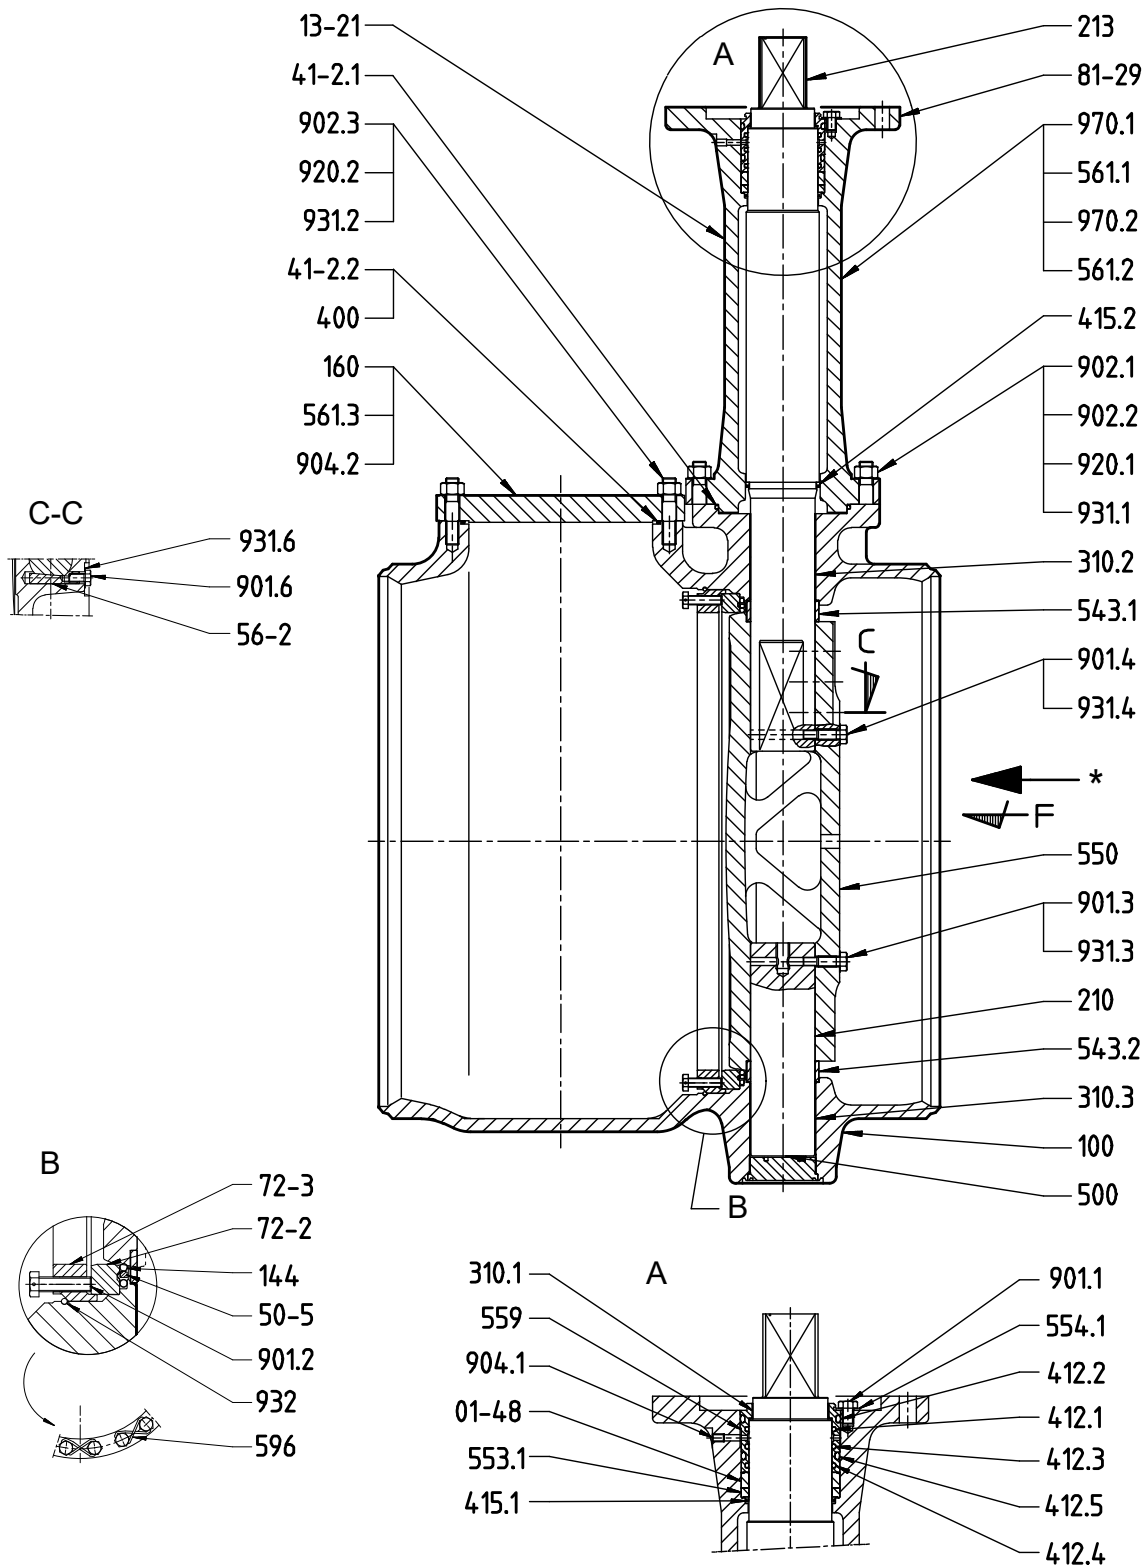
Sectional drawing of TRIODIS 150 CRYO BWSE - DN 750-850 (30-34 inch)
